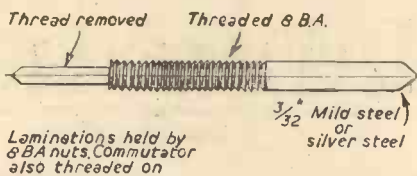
Silver steel threaded spindle for mounting the armature laminations.
